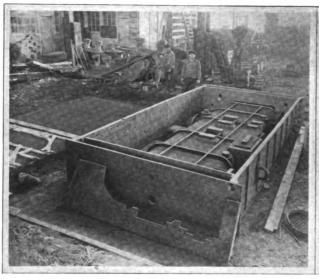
PREPARING MOLD FOR CONDENSER CASTING
